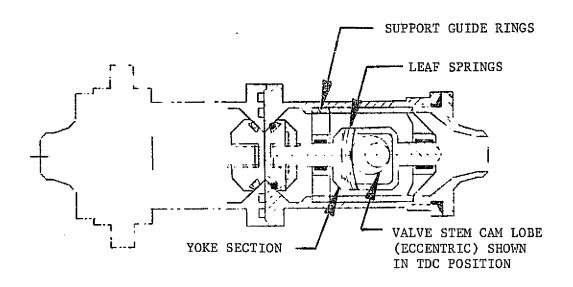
CUTAWAY PLAN VIEW OF PID
